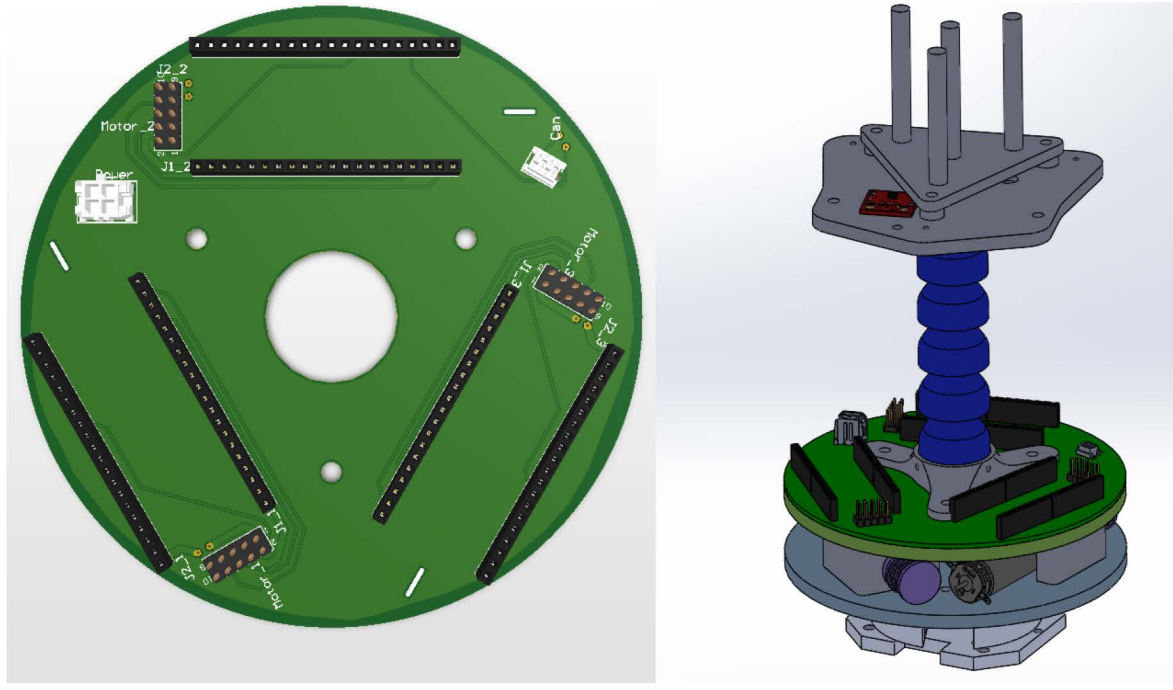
Final design of the connection board and CAD simulation of its assembly on the soft neck platform.
